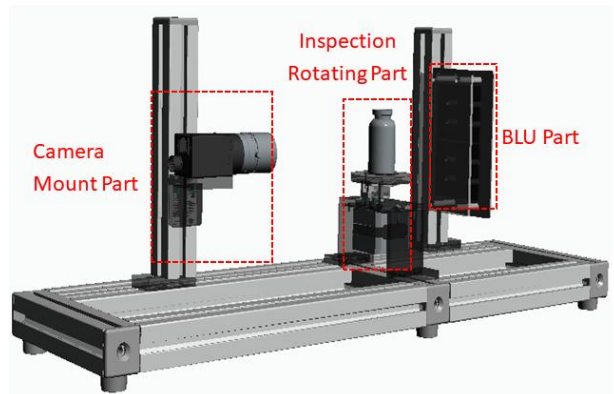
Design Diagram for Machine Vision Inspection of Polygonal Containers.
